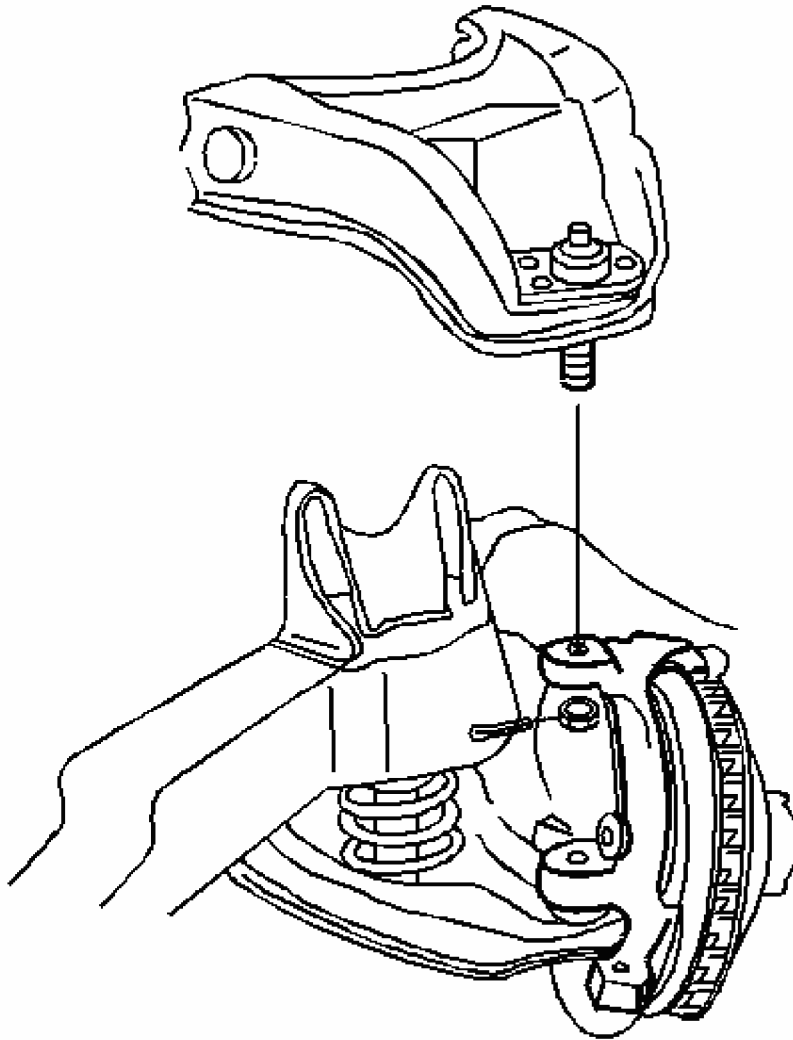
Installing The Upper Ball Joint To The Steering Knuckle
